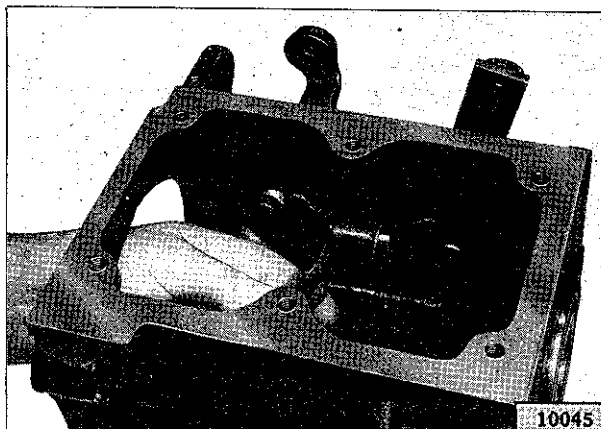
INTERLOCK SLEEVE CLEARANCE
